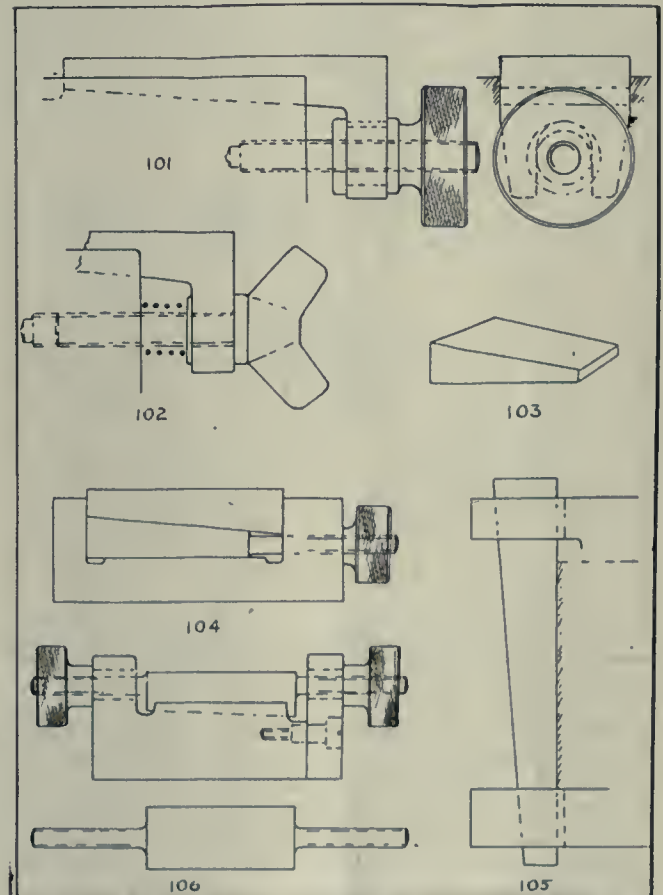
is a method of pressing on to surfaces by pushing a plate upon a taper surface. In drill jig work this method of clamping will be found very convenient in closed-in places, where it is almost impossible to get other levers or screws. Particular interest should be taken in the construction shown. The operating screw is all self contained. It will be readily seen that this works on a stud screwed into the jig. When this has become worn it can be replaced at little expense. For convenience of fitting, a slot is cut into the adjusting piece. This gives an up and down motion, as
